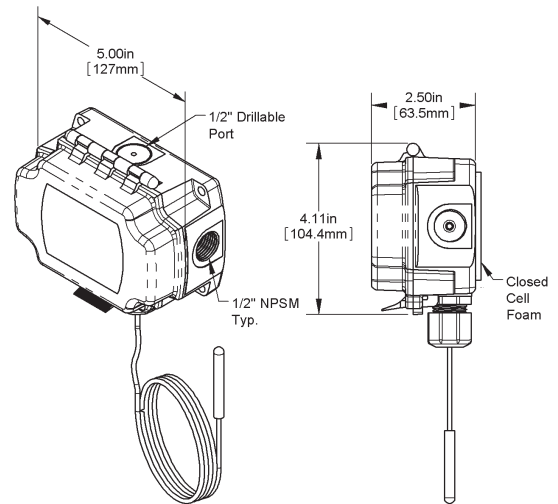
Remote Probe in a BAPI-Box (BB) Enclosure
